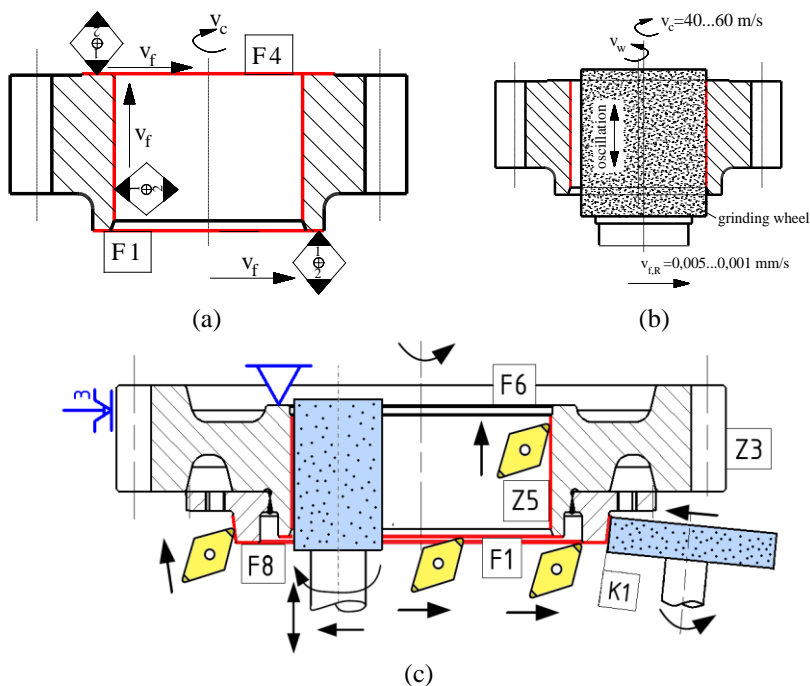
Material removal by (a) hard turning, (b) grinding and (c) joint machining
